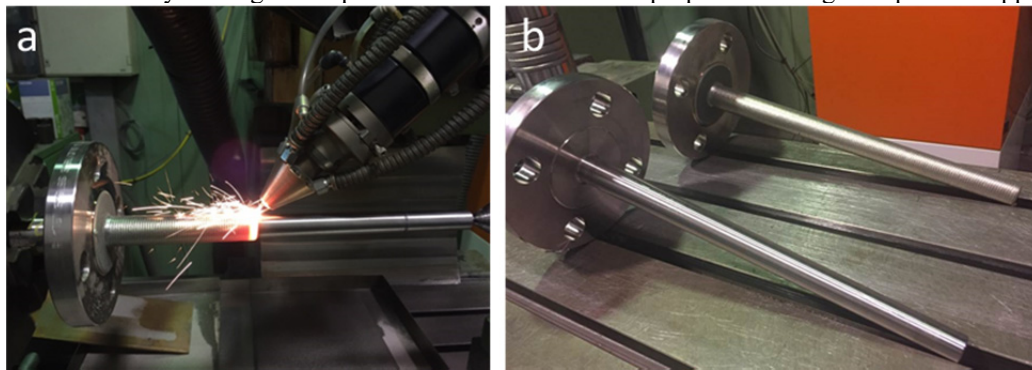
(a) cladding process of end user parts; (b) completely cladded part
